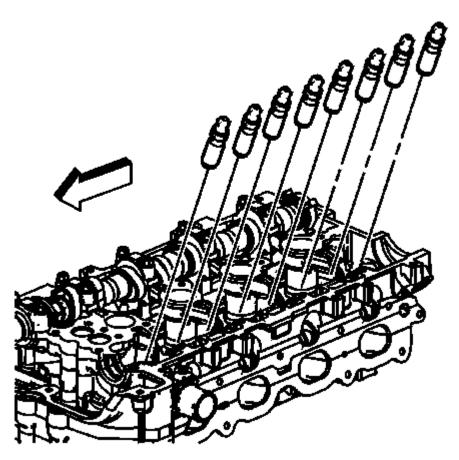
Locating Front Cylinder Head Bolts Courtesy of GENERAL MOTORS CORP.
